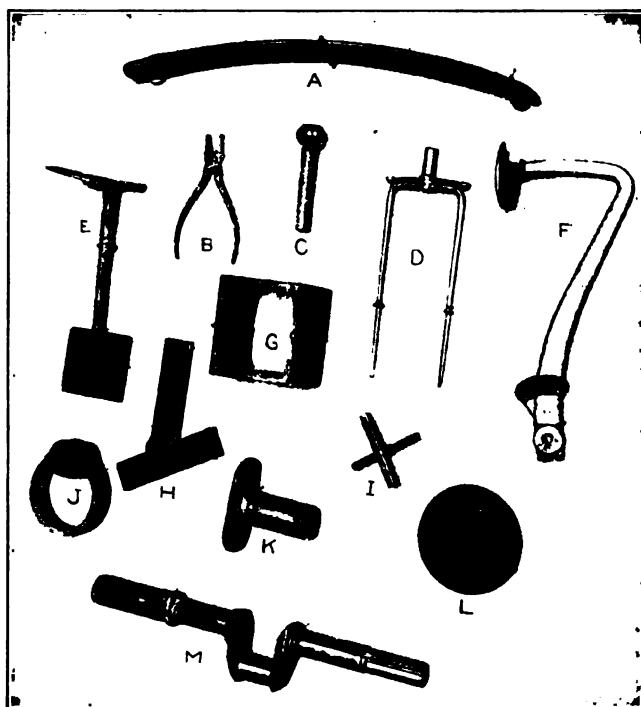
Examples of Butt-welded Work adapted particularly to the Automobile Industry
